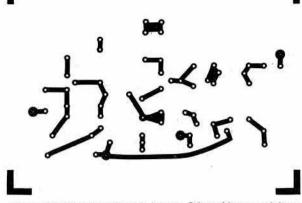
Pre-driver board track layout. Other side groundplane. Enlarge all holes on groundplane side before mounting components
